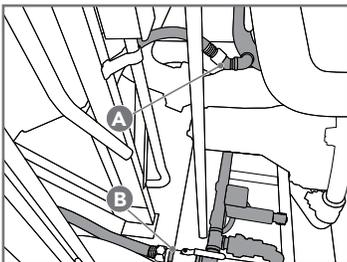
Typical oil discharge port (A) installed at locomotive engine lower P-pipe. Note coolant suction port (B) located at locomotive main engine drain.
